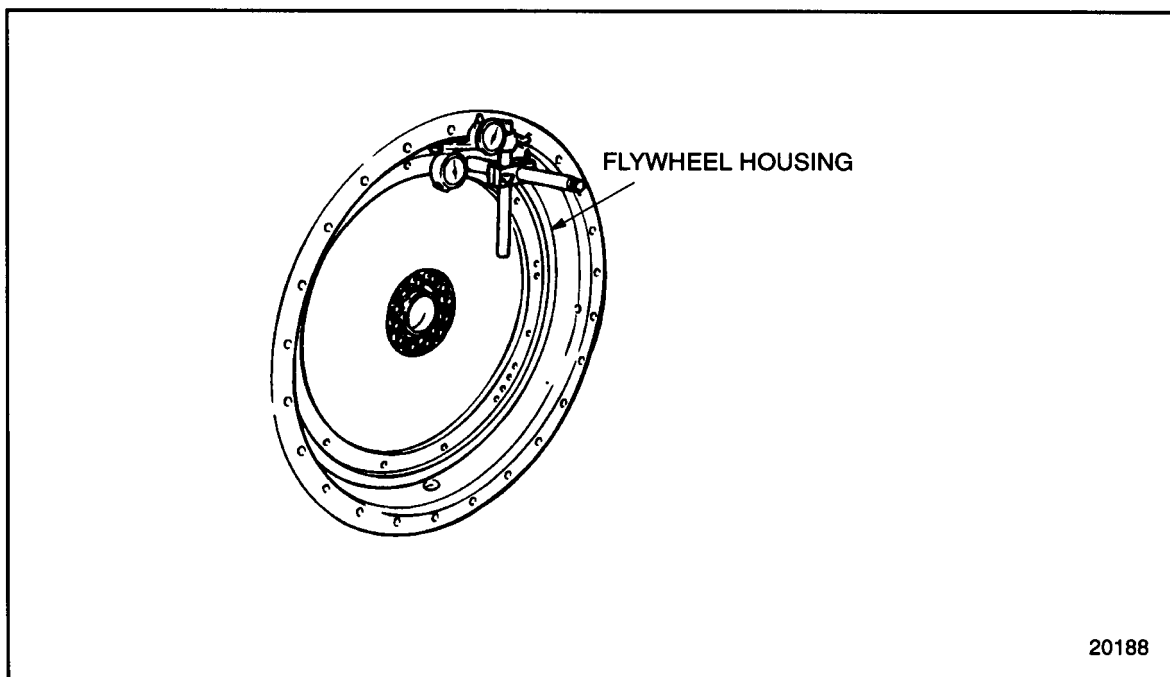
Measuring Flywheel Housing Bore Concentricity
